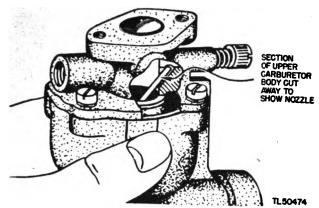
Carburetor nozzle on Briggs and Stratton engine.
